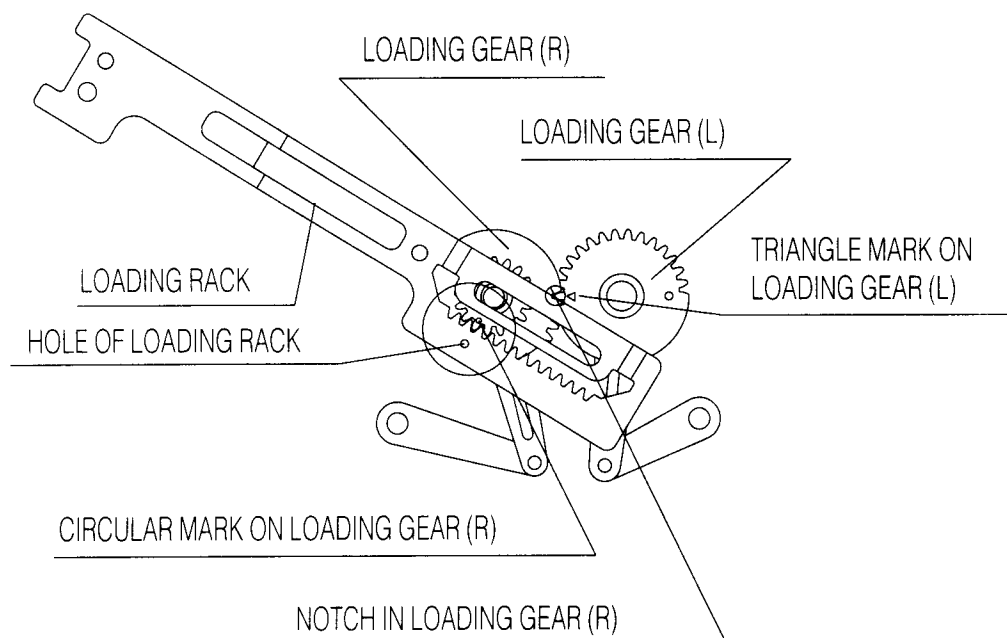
ASSEMBLY OF the R.L LOADING ASS'Y & LOADING RACK ASS'Y
